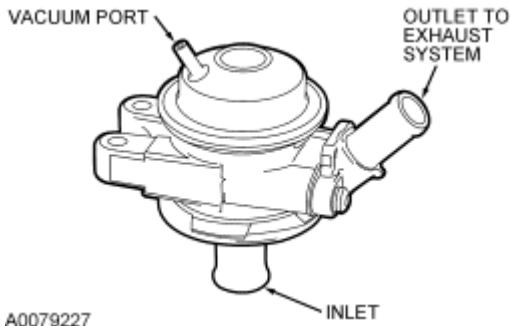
Air Injection Diverter (AIR Diverter) Valve
